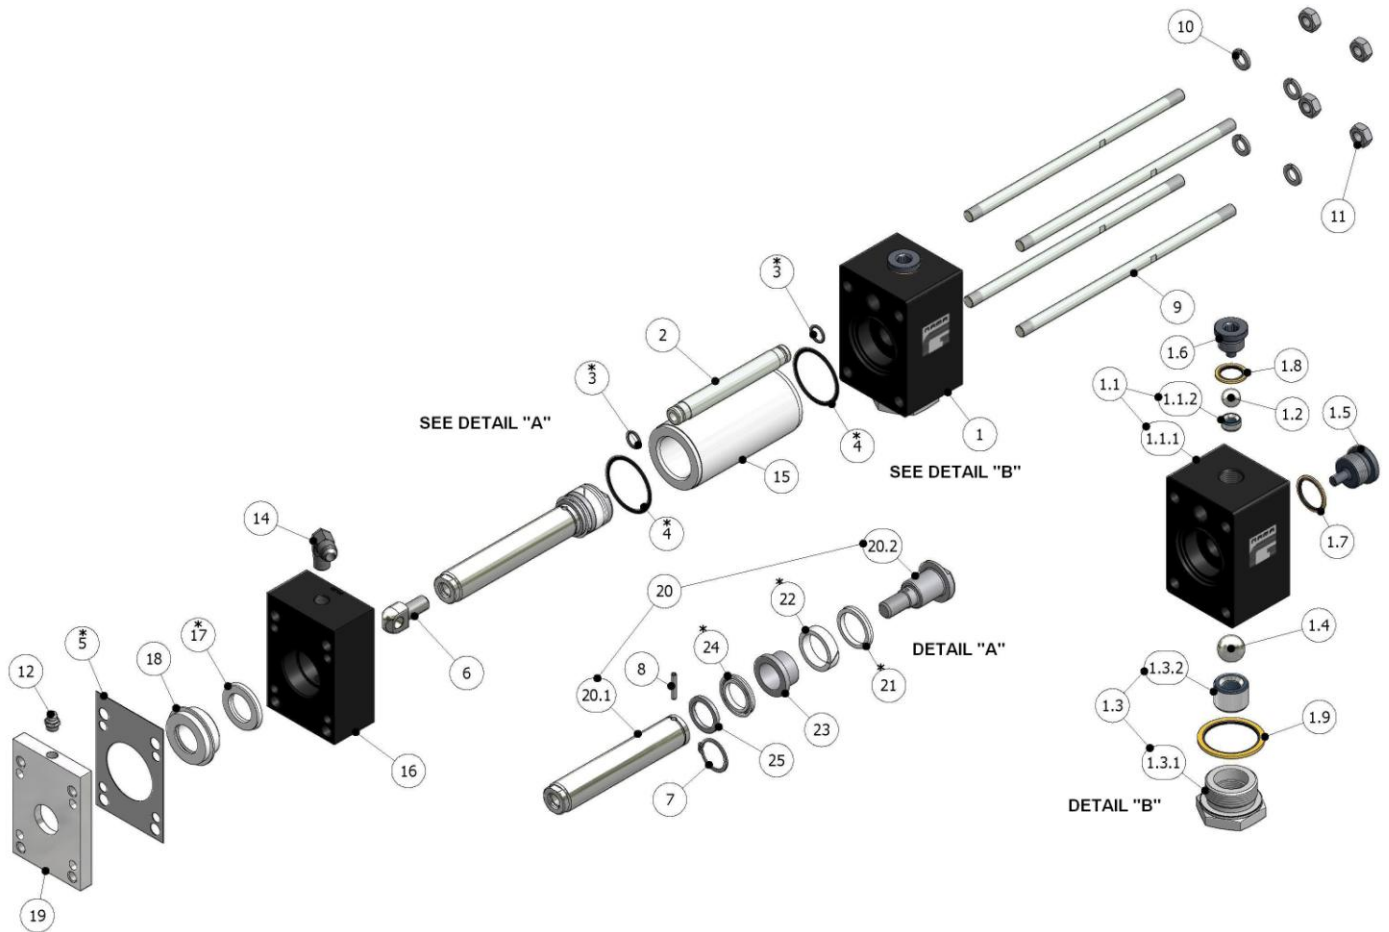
“R” Proportioning Pump Assembly, Exploded View
